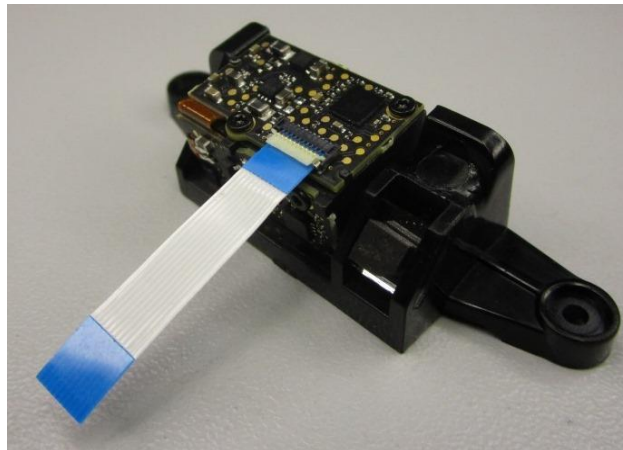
SKORPIO X4 – Barcode Reader Assembly-1D Imager
